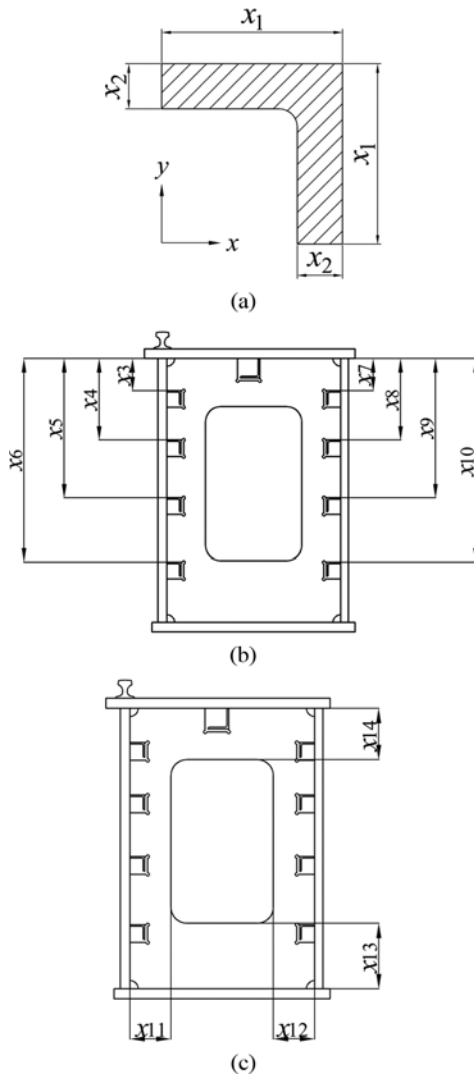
Design Variables of Stiffeners in Bias-Rail Box Girder: (a) Sizes of Longitudinal Stiffening Ribs, (b) Location of Longitudinal Stiffening Ribs, (c) Hole Position of Transverse Diaphragms
